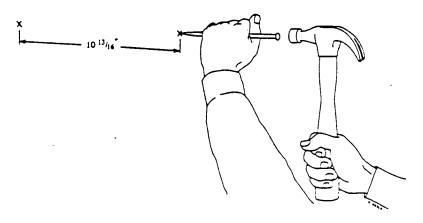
LOCATING THE CEU MOUNTING HOLES
